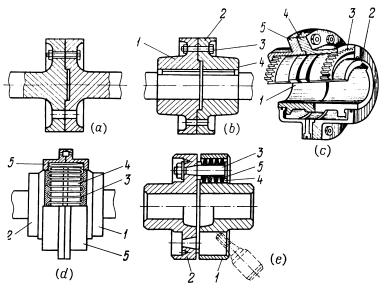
Solid-forged connection of shafts and shaft couplings
